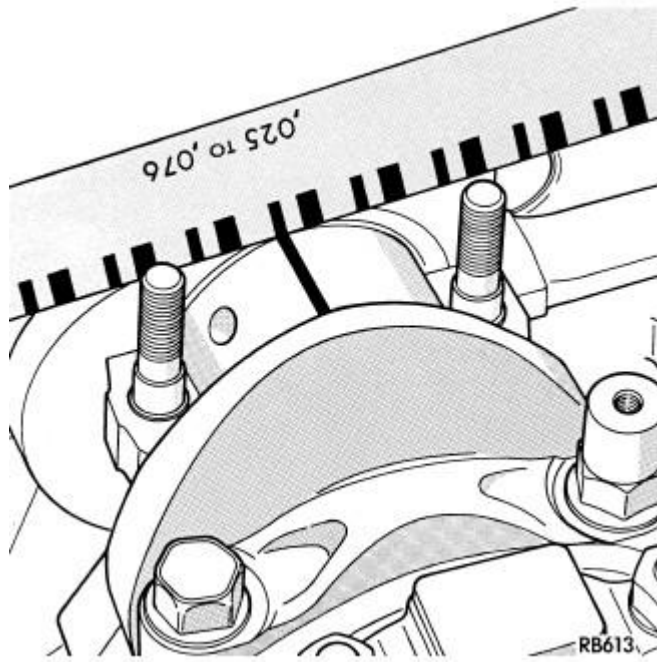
Checking Connecting Rod Bearing Clearance With Plastigage
